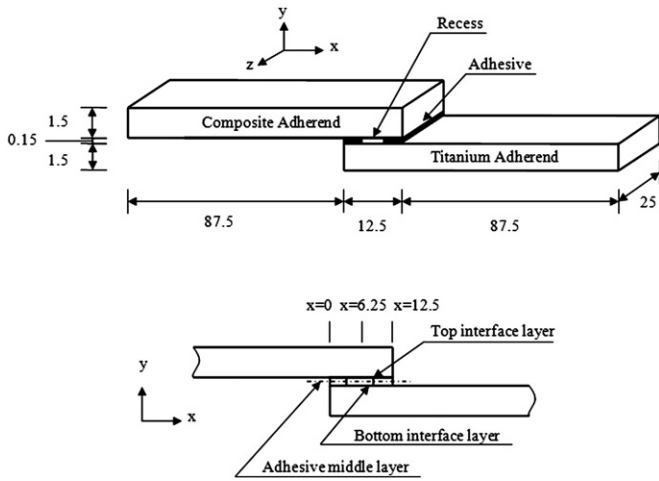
Recessed single-lap dissimilar joint with dimensions in mm.
